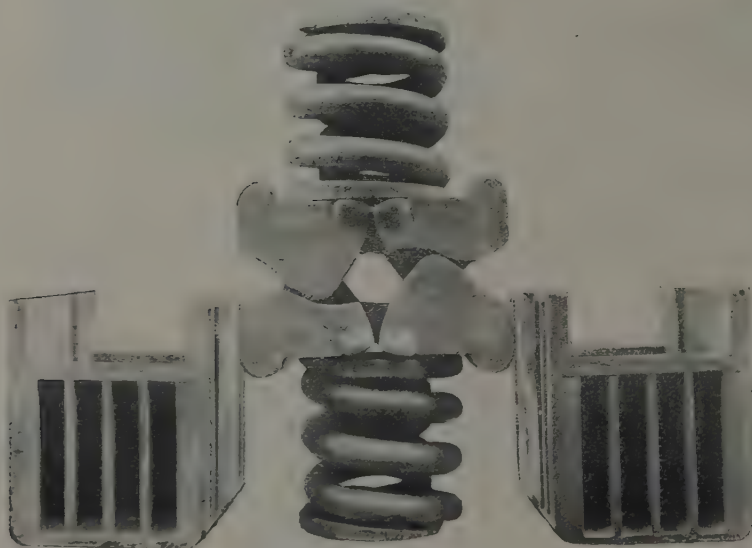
Bradford Type K Draft Gear with Cages Removed.
